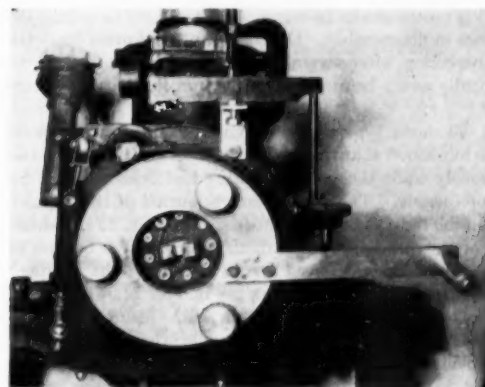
BACKLASH CHECK ON HUP FORWARD SPIRAL BEVEL PINION
